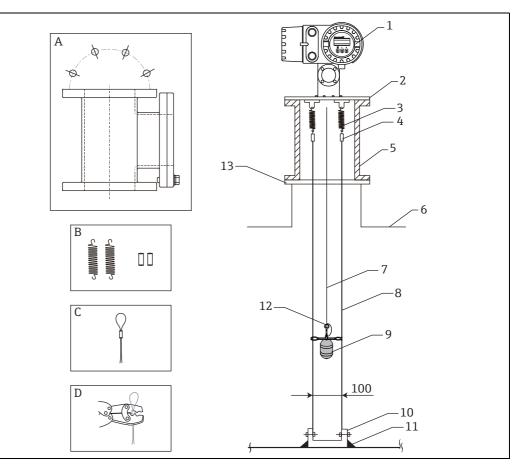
Mounting with guide wire, unit of measurement: mm (in)
